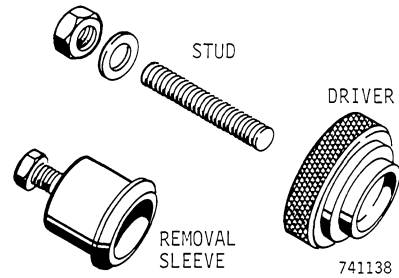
D62920 Tool Kit for Timing Gear Cover Seal Removal and Installation
